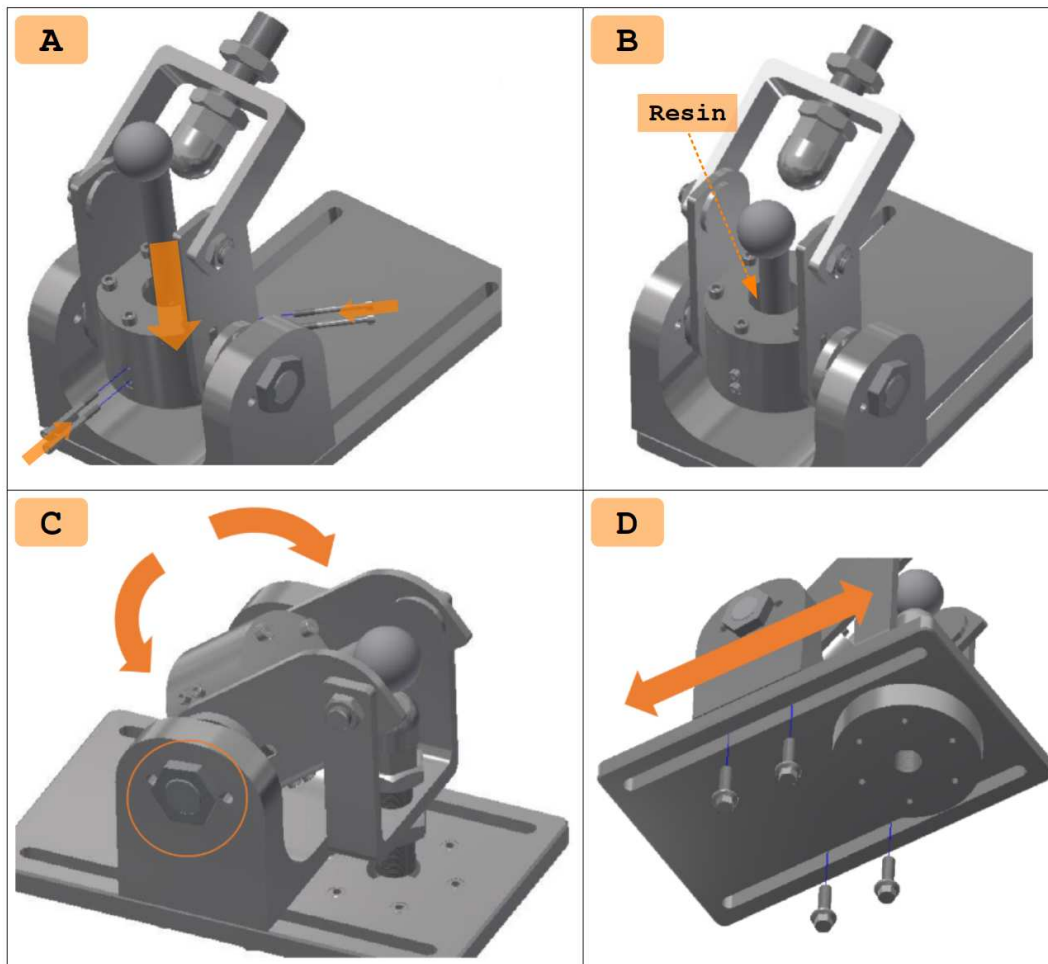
Bone centering and fixture base positioning. A: With the receptacle with a layer of mold release agent and playdough filling in the bottom screw holes, the bone is placed inside the receptacle and centered using the 6 lateral screws (BOM art. # 22). B: Once the bone is in its position, the resin is poured over the receptacle. C: The base can be rotated by loosening the shrink disks with a 42 mm wrench. Once positioned, the shrink disks are tightened again. D: The base translation is necessary to align the humeral head with the testing machine axis. This is done using the 4 screws at the bottom of the plate. For a tensile test without head support, it can be either rotated to avoid interactions or completely removed.
